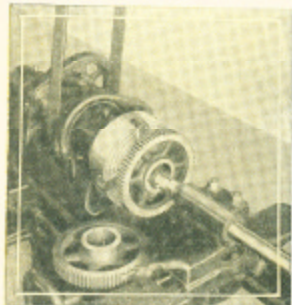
Cutting a Keyway in a Gear on a 13-inch Lathe.
